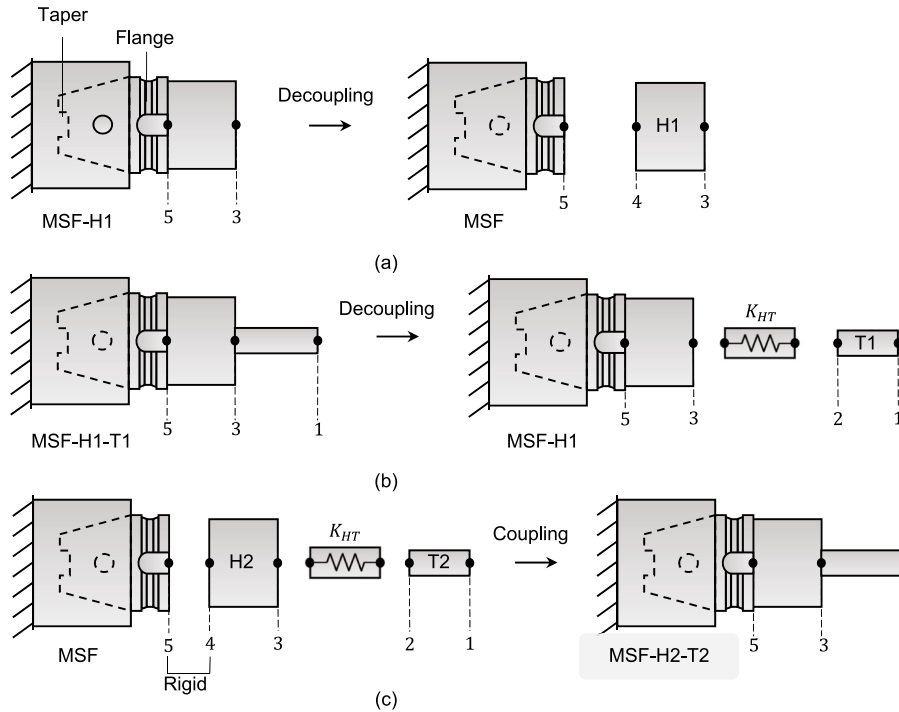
Spindle-holder-tool substructures and assembly for the proposed computational approach using Receptance Coupling Substructure Analysis (RCSA) to predict tool tip dynamics. (a) Decoupling holder 1 (H1) from the machine-spindle-flange assembly (MSF) to obtain the MSF receptance matrix ($[G_{55}]$). (b) Decoupling tool 1 (T1) from the machine-spindle-flange-holder 1 (MSF-H1) assembly to obtain holder-tool contact stiffness matrix ($[K_{HT}]$). (c) Coupling new tool (T2), with a new holder (H2) and the MSF.
